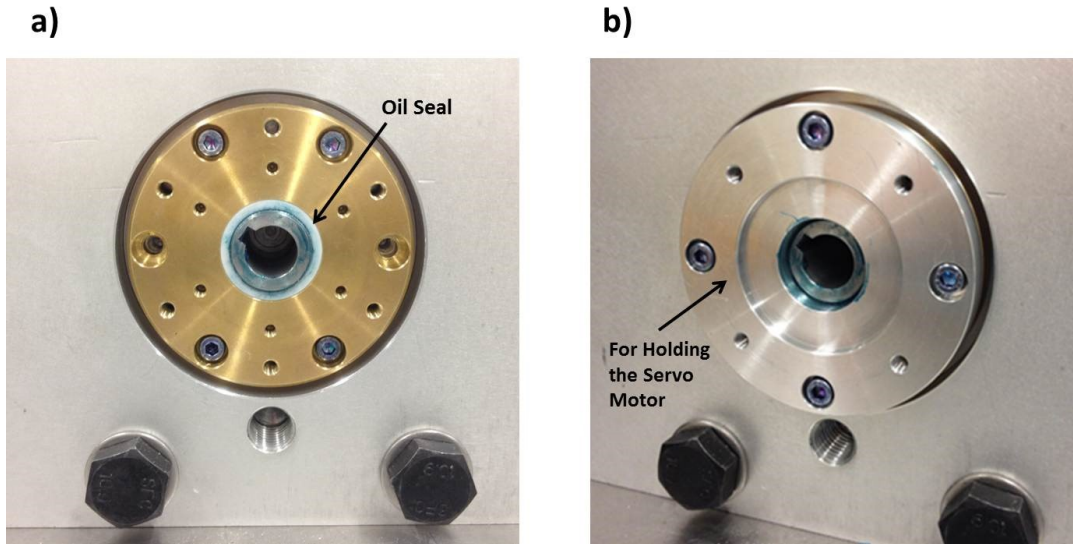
a) Installation of the brass flange at the back plate b) installation of the aluminum flange onto the brass flange.
